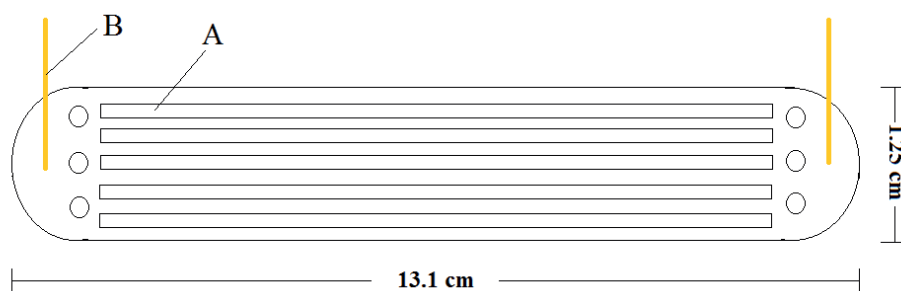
Gold wires welded to the bipolar plate. A) Flow field. B) Gold wire.
